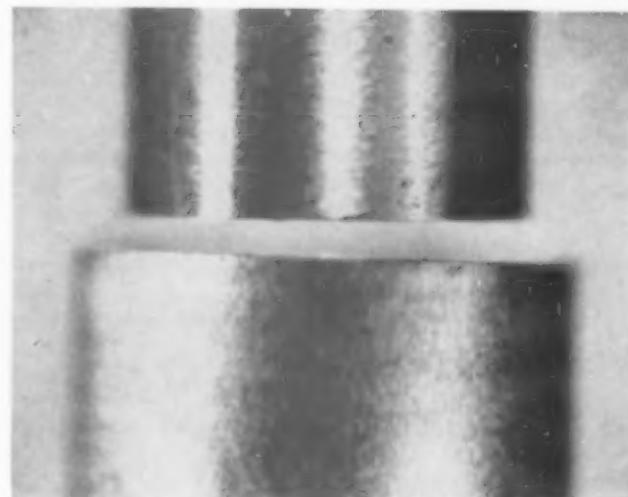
The contrast between straight grinding (punch at bottom) and cylindrical grinding is shown in the micro-photo above.
